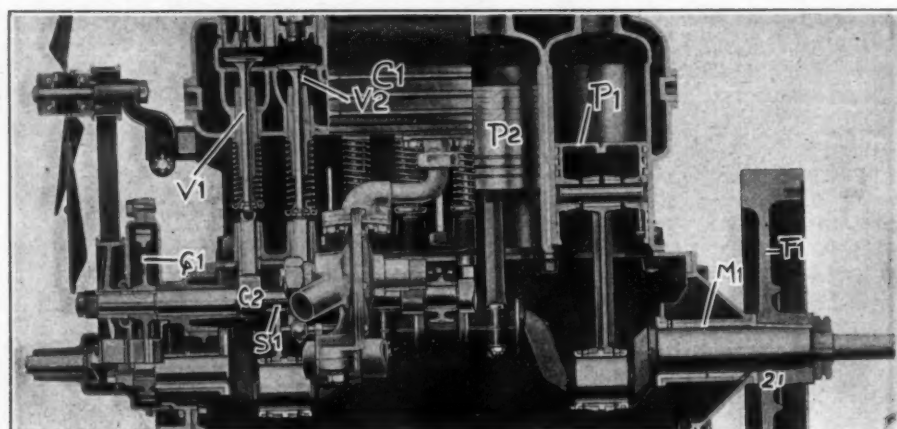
Flanders "20" motor in part section, to show details and crankshaft
